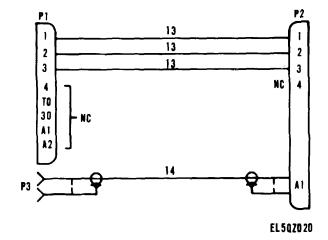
Cable Assembly, Special Purpose, Electrical 217-803023-000(4W2), Wiring Diagram.
